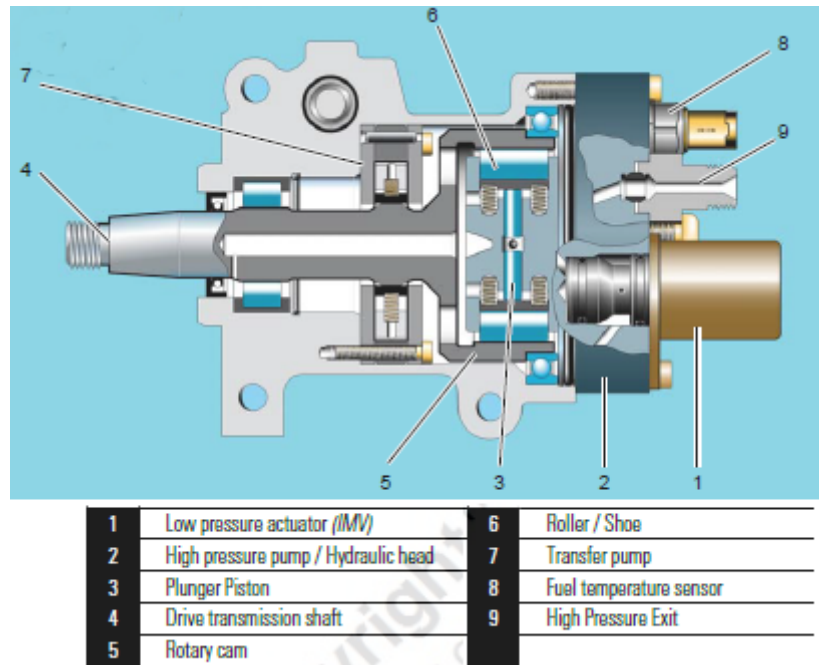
High-pressure fuel pump cross-sectional view [217].
